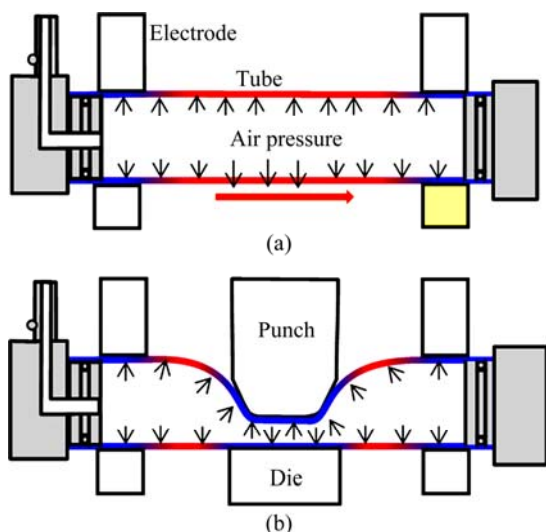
V-shaped hot forming using sealed air: (a) Resistance heating; (b) Forming and die quenching
